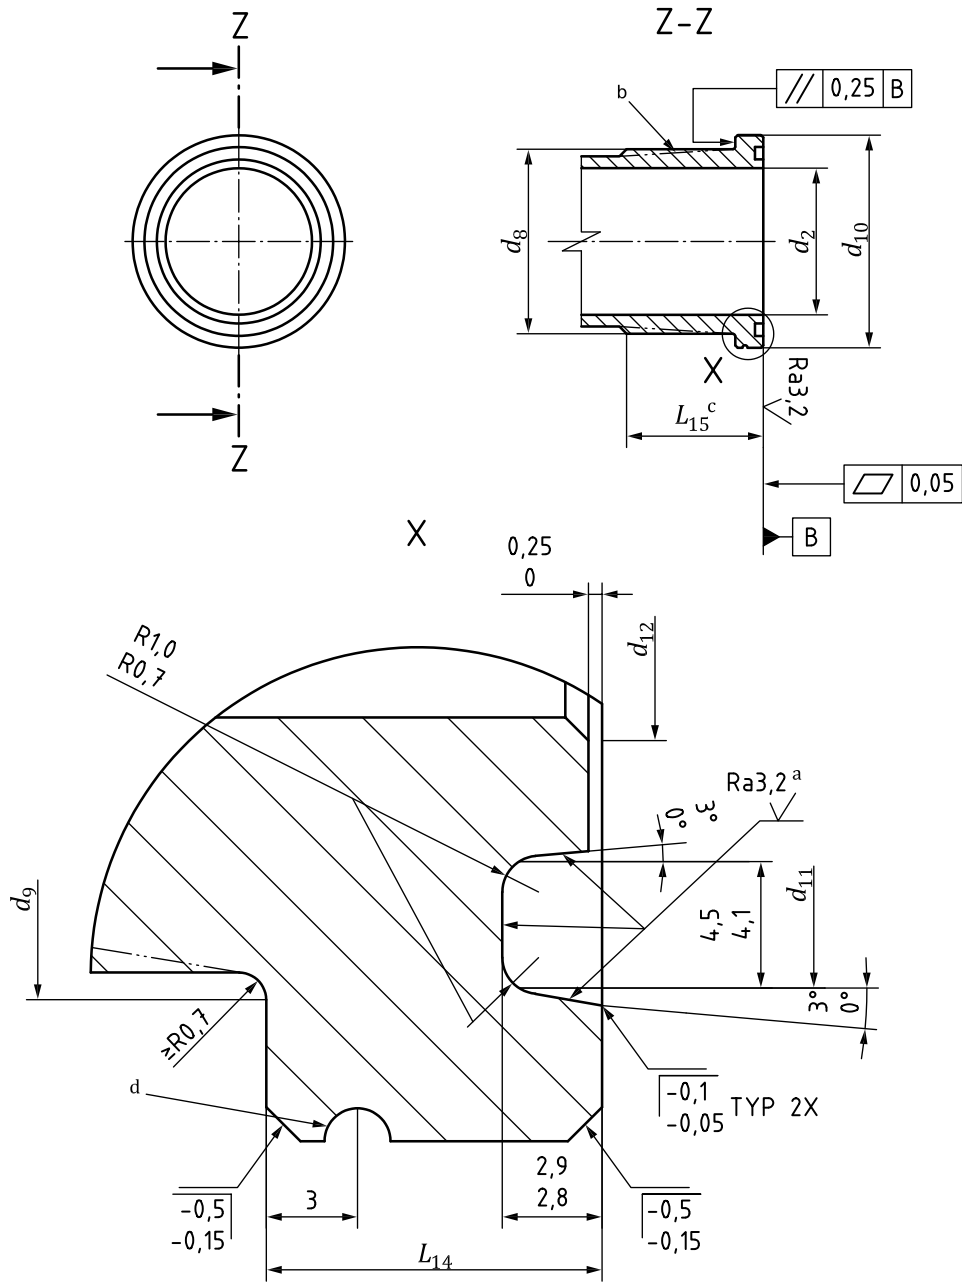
One-piece flange clamp (FC or FCM) (see [Table 3](#))
